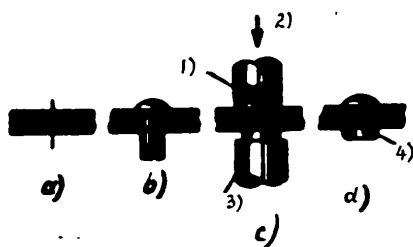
Riveting Rivets with Protruding Heads by the Reverse Method
